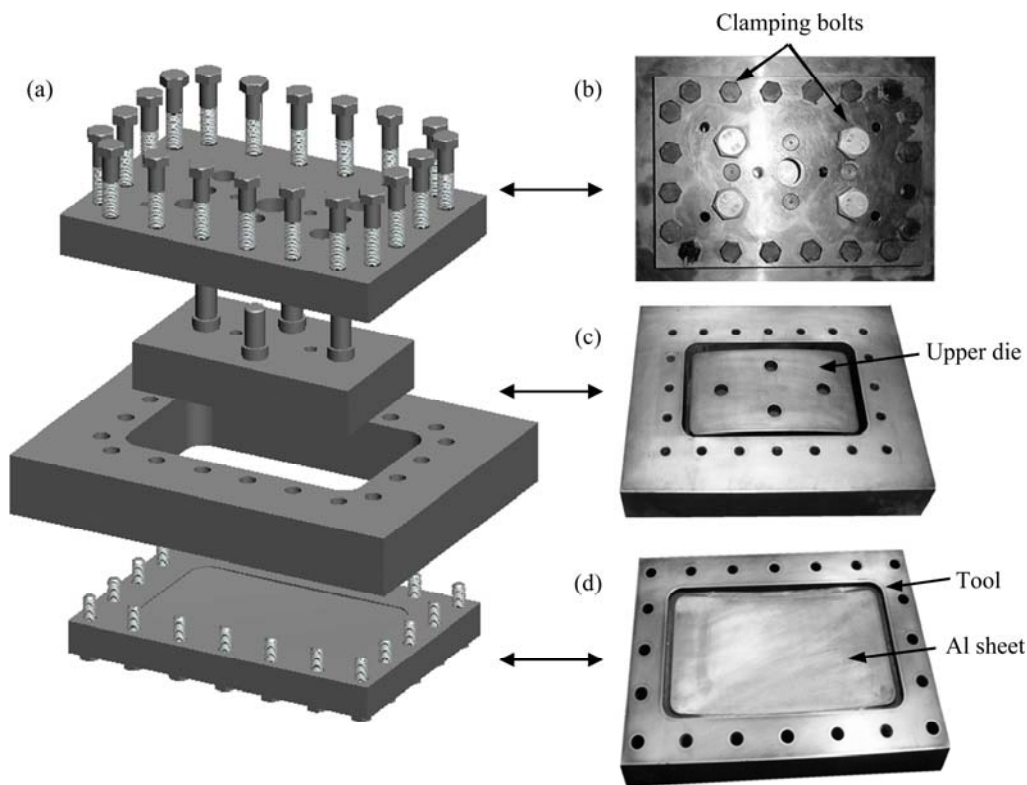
Schematic illustration of creep forming tools: (a) Assembly diagram of tool parts; (b) Fixing plate and clamping bolts; (c) Upper die; (d) Al sheet on tool surface
